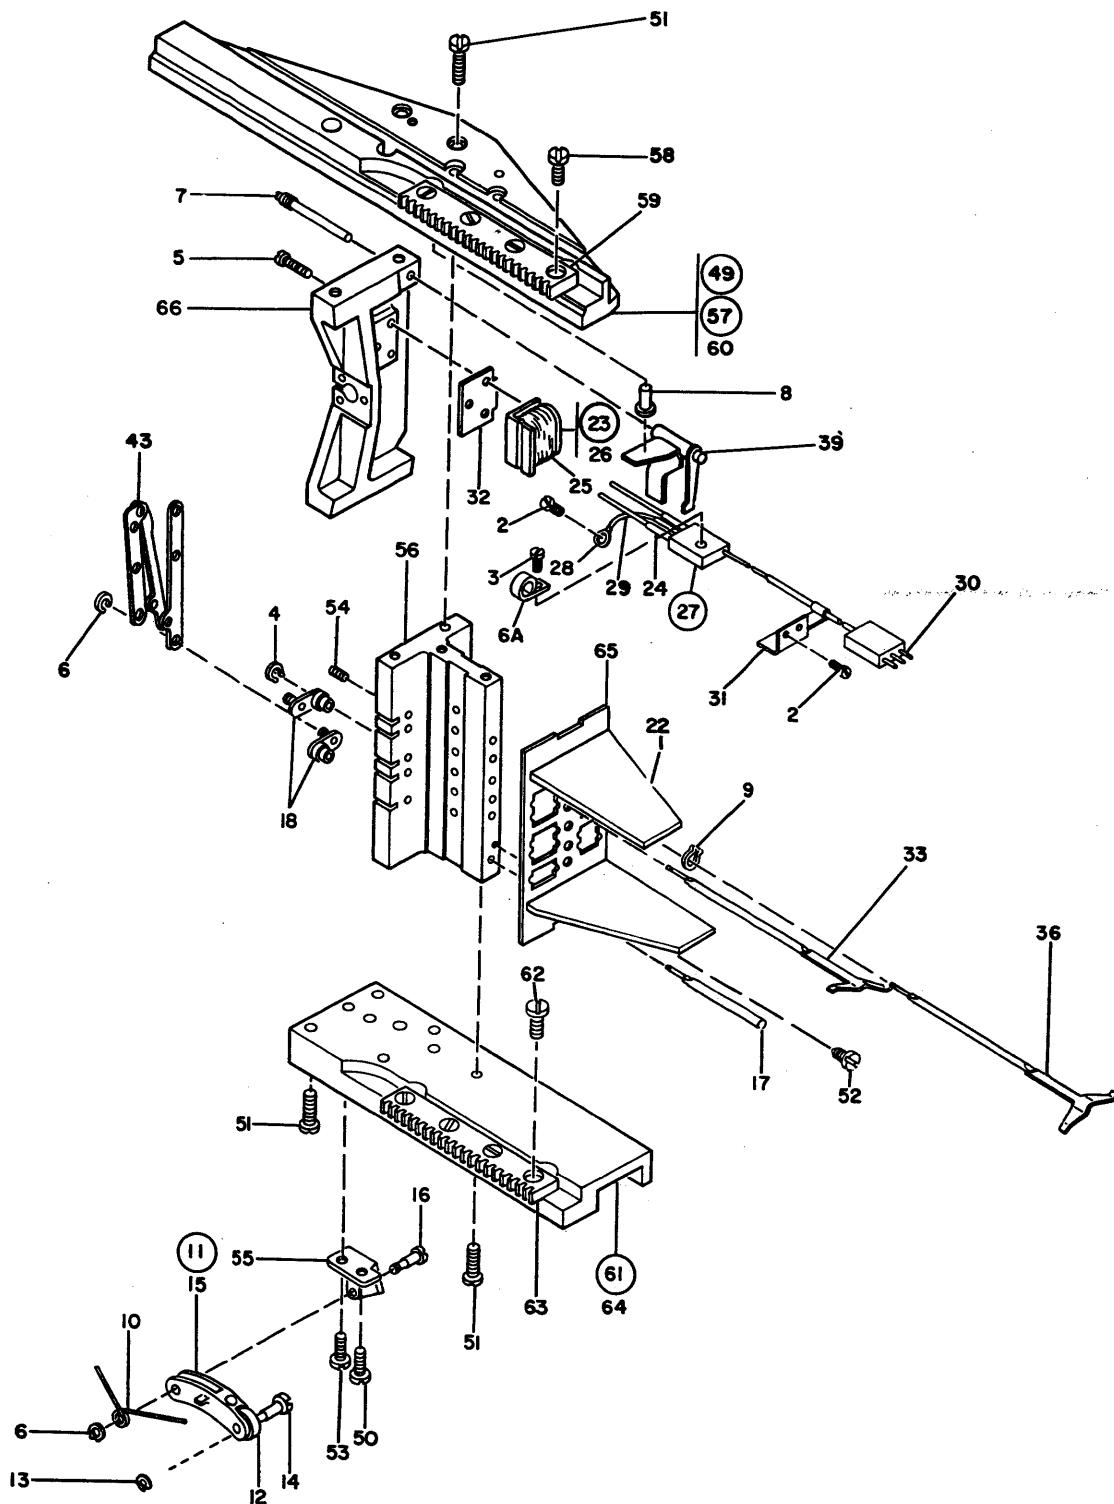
HEAD CARRIAGE ASSEMBLY. SEE LIST 11.
